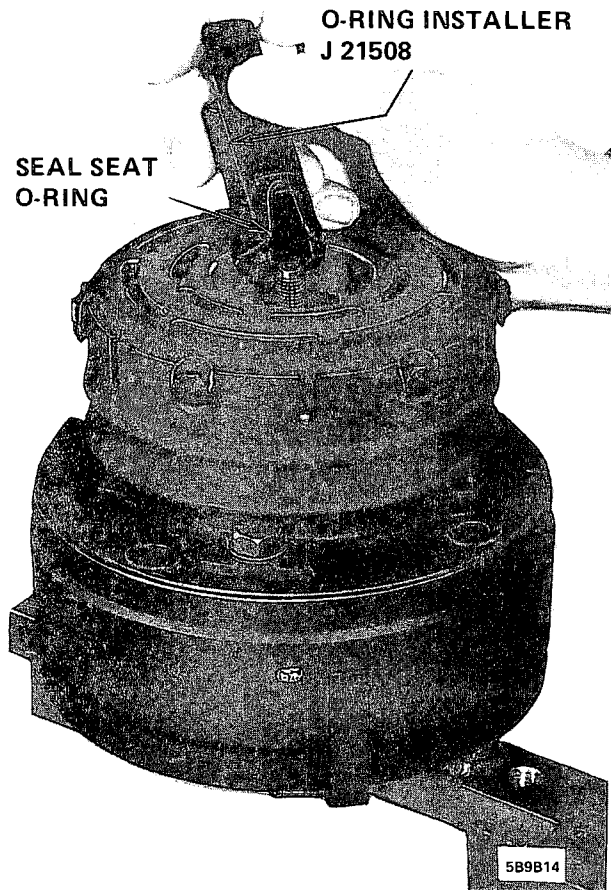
B-37 - Installing Seal Seat O-Ring - 4 Cylinder Compressor
